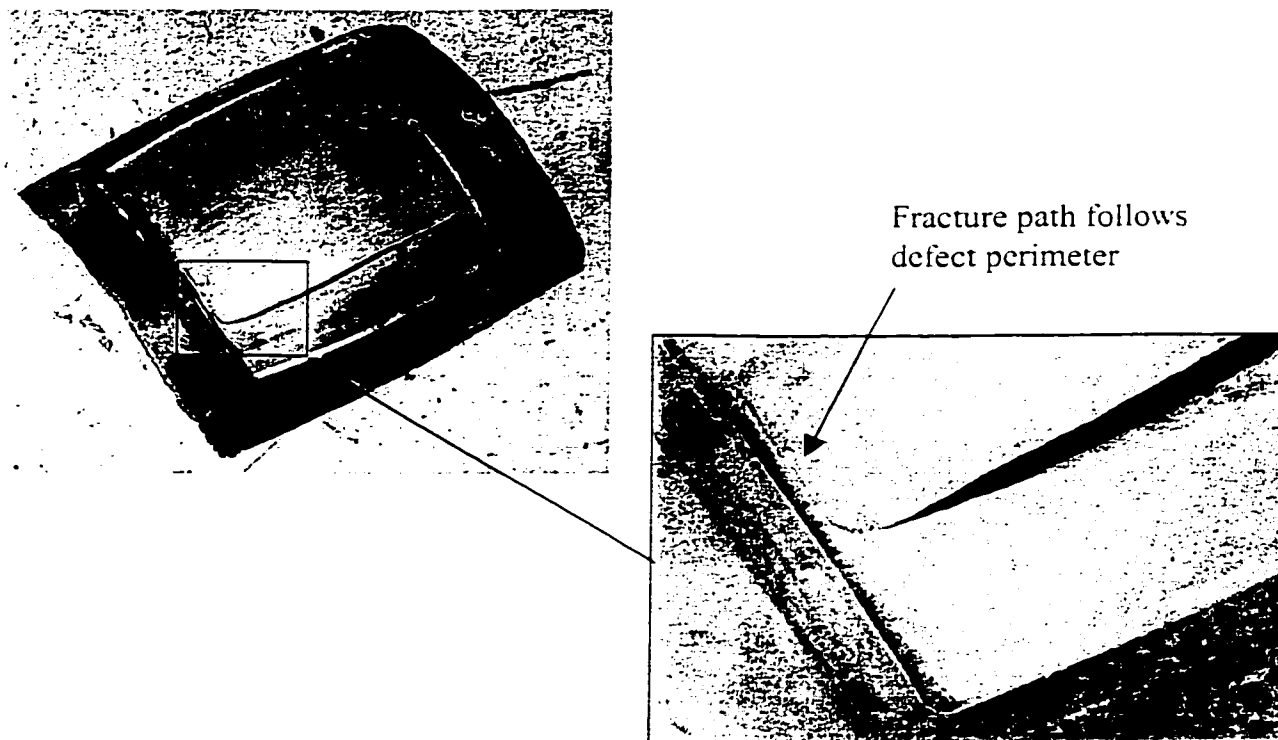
Fracture path for a large flat-bottomed defect
